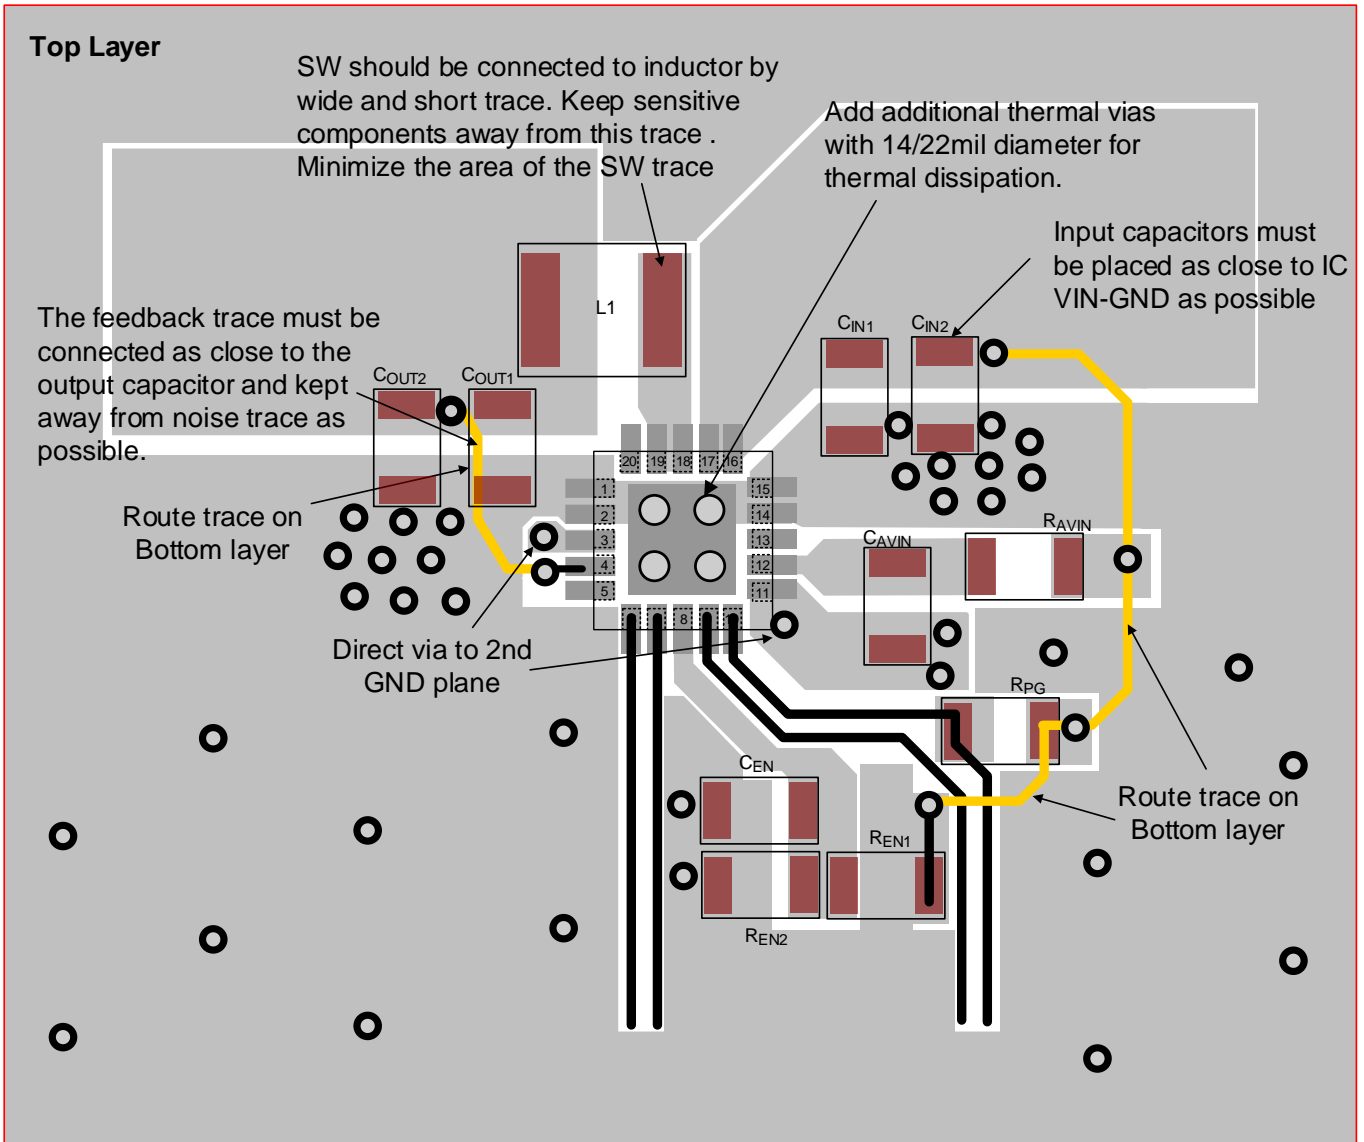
PCB Layout Guide for WQFN-20L 3.5x3.5 package
